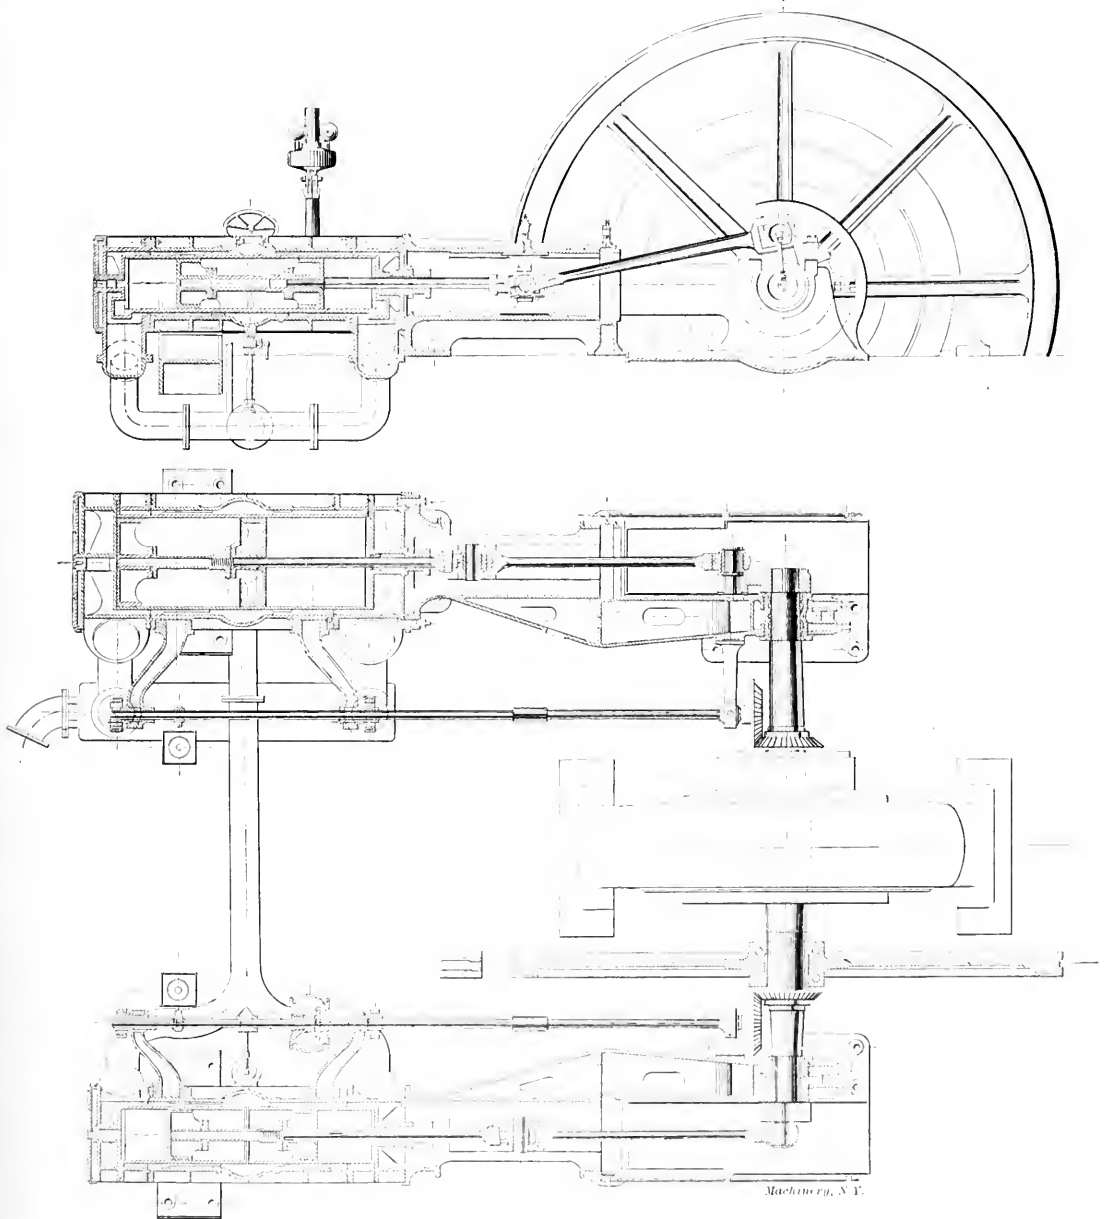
Sectional Elevation and Plan of Cockerill Engine.
